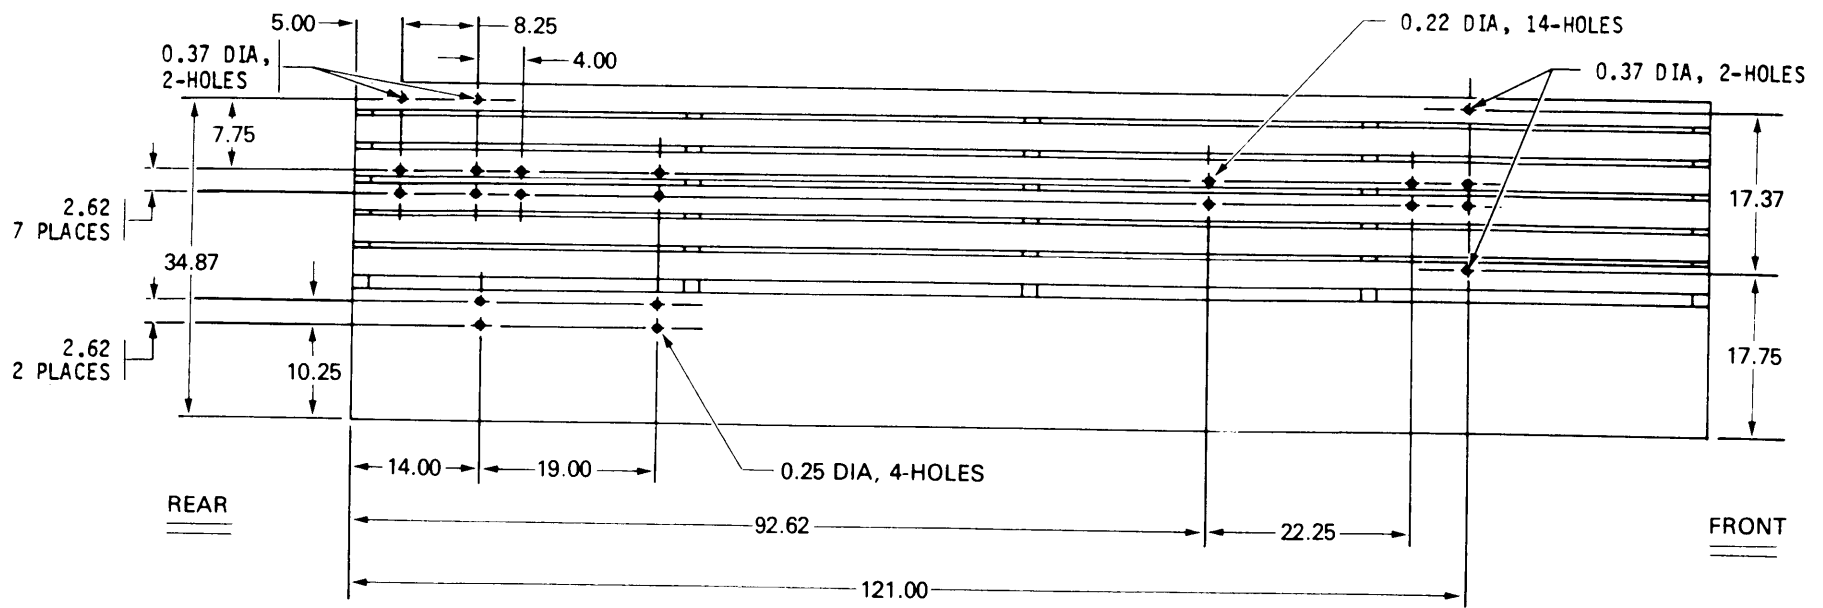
Hole Dimensions for Blind Rivet Nuts and Strap Loops, Unit 1, M35A2, Left Side Elevation.
